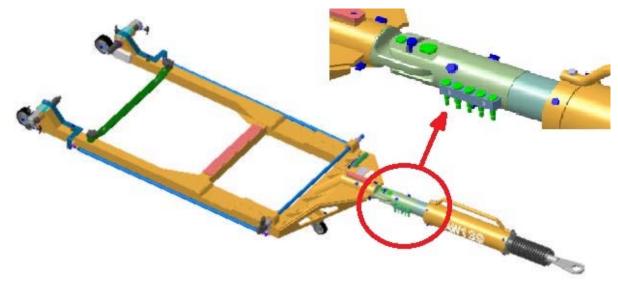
Tow Bar Assy longitudinal section: spare steering safety pins detail
